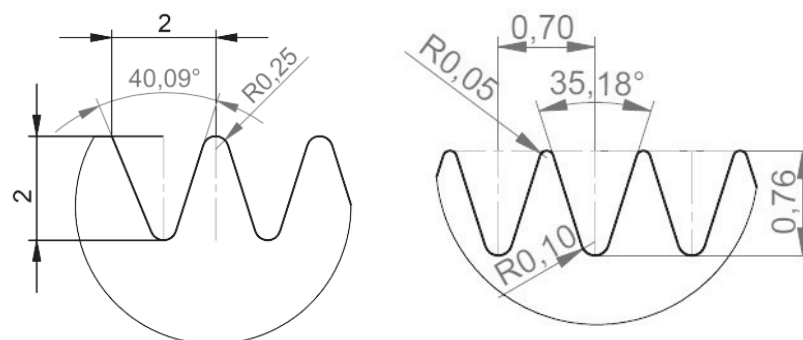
Technical draw of the multi-indenters geometry used for the friction tests
